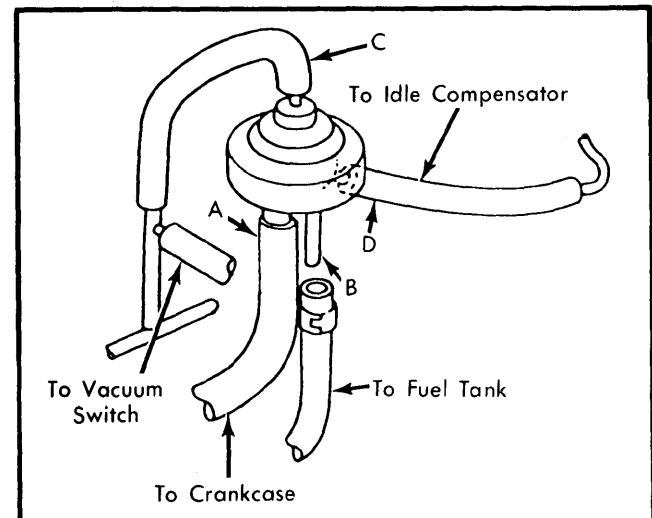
Crankcase Ventilation and Check Valve for Rotary Engine (RX-7)
